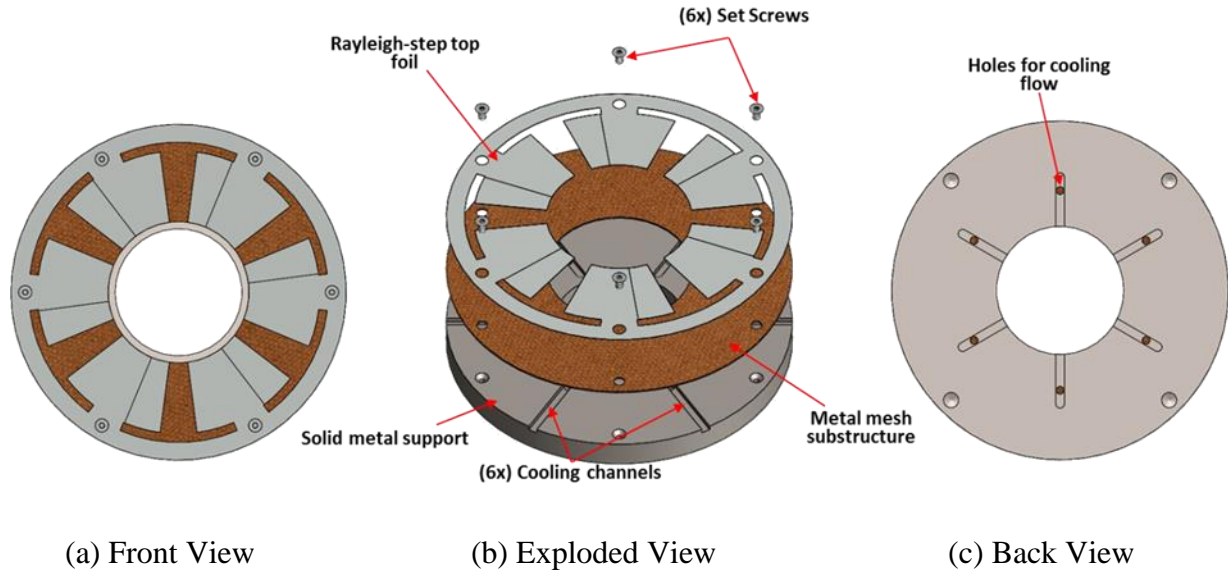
(a) Assembled front view (b) an exploded view and (c) assembled back view of a Rayleigh-step metal mesh thrust foil bearing.
